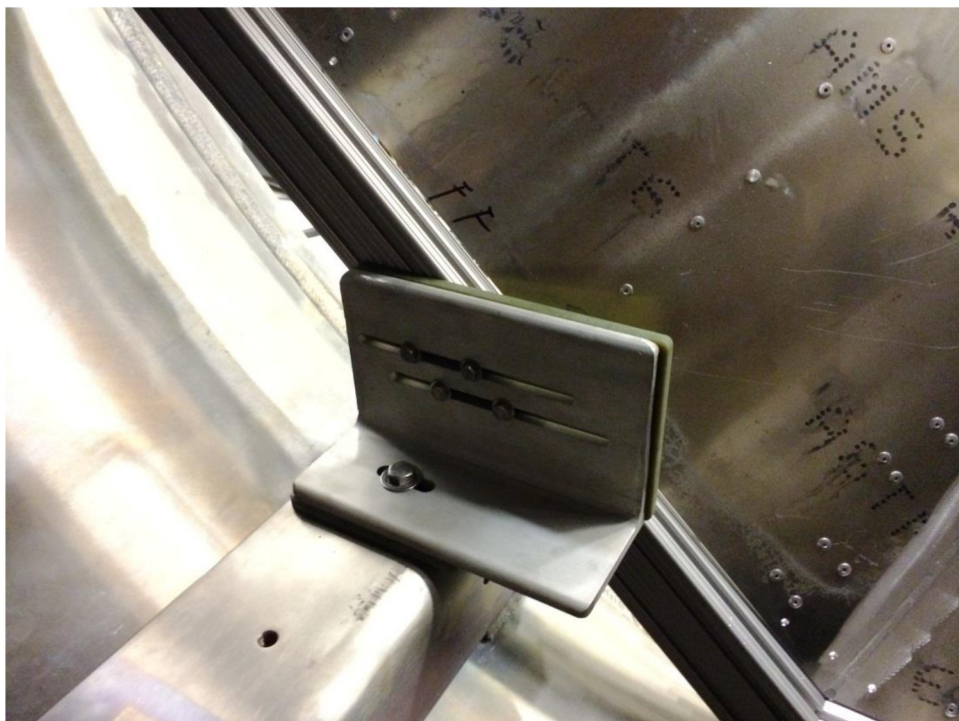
Chamber internal mounting bracket with fiberglass thermal insulation blocking.
